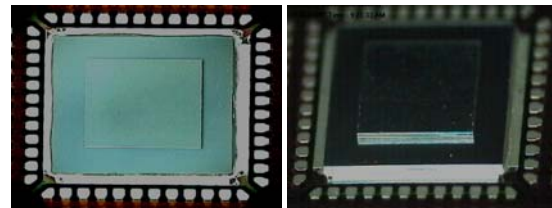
Top view and side view of the unmolded, 48 leads QFN stacked die package
